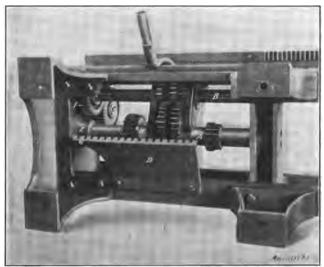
Quick-change Gear Mechanism of Lathe shown in Fig. 1
